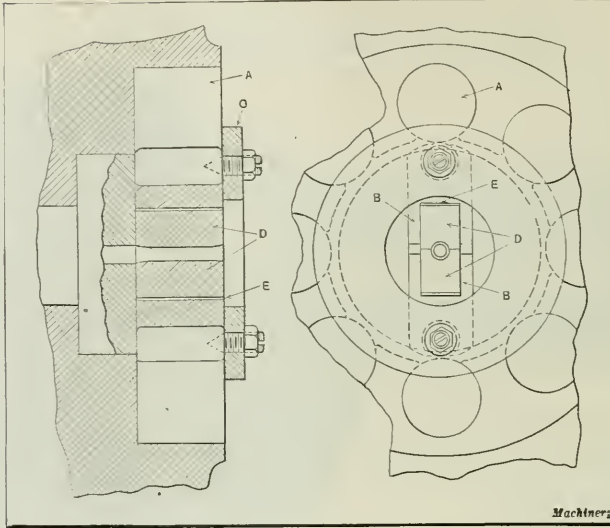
Construction of the Fixed-roll Type of Swaging Machine Head
